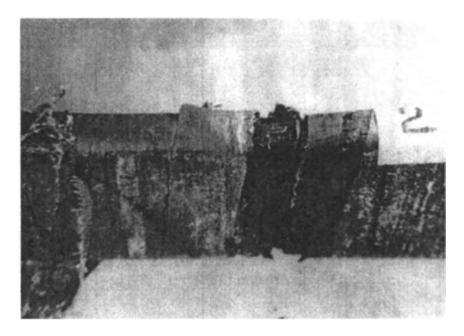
[S27] This coil shows a girth crack in the wall insulation in the area of a cooling vent. The coil was removed from the core, and the tape above the girth was peeled off by the inspector to get a better look at the damaged insulation.
